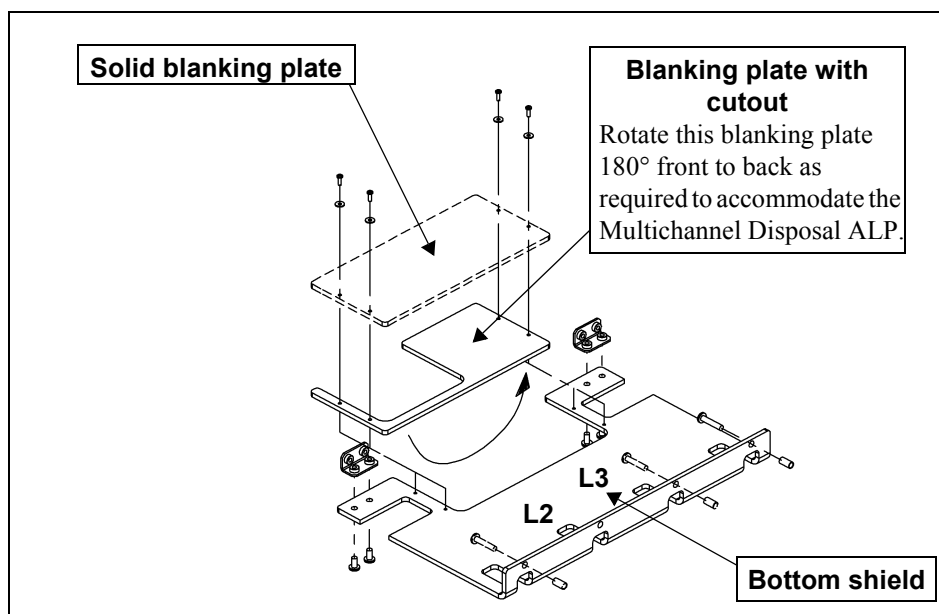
Left side bottom shield with solid and cutout blanking plates
